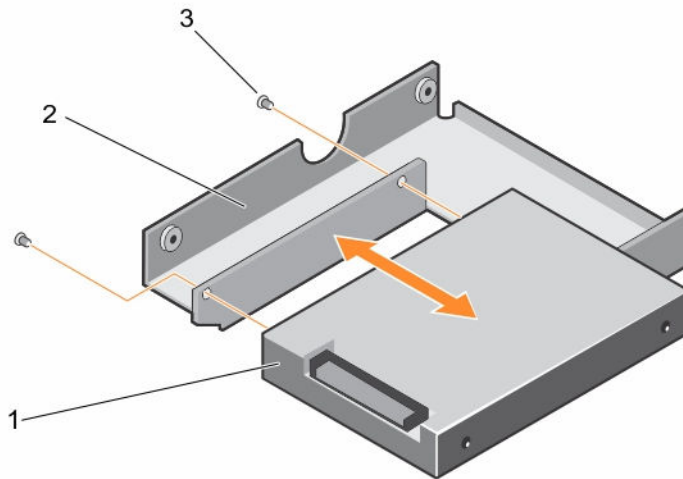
Removing and installing a 2.5 inch hard drive into a 3.5 inch hard-drive adapter
